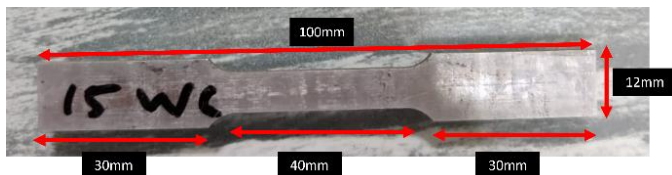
Schematic view of coupon specimen, sample coupon specimen.
